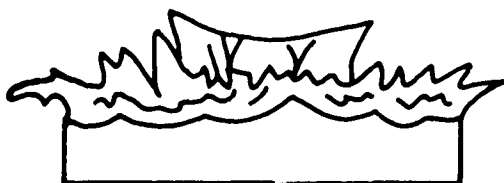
DISTORTION PRODUCED IN EXPLOSIVE HOLDER
